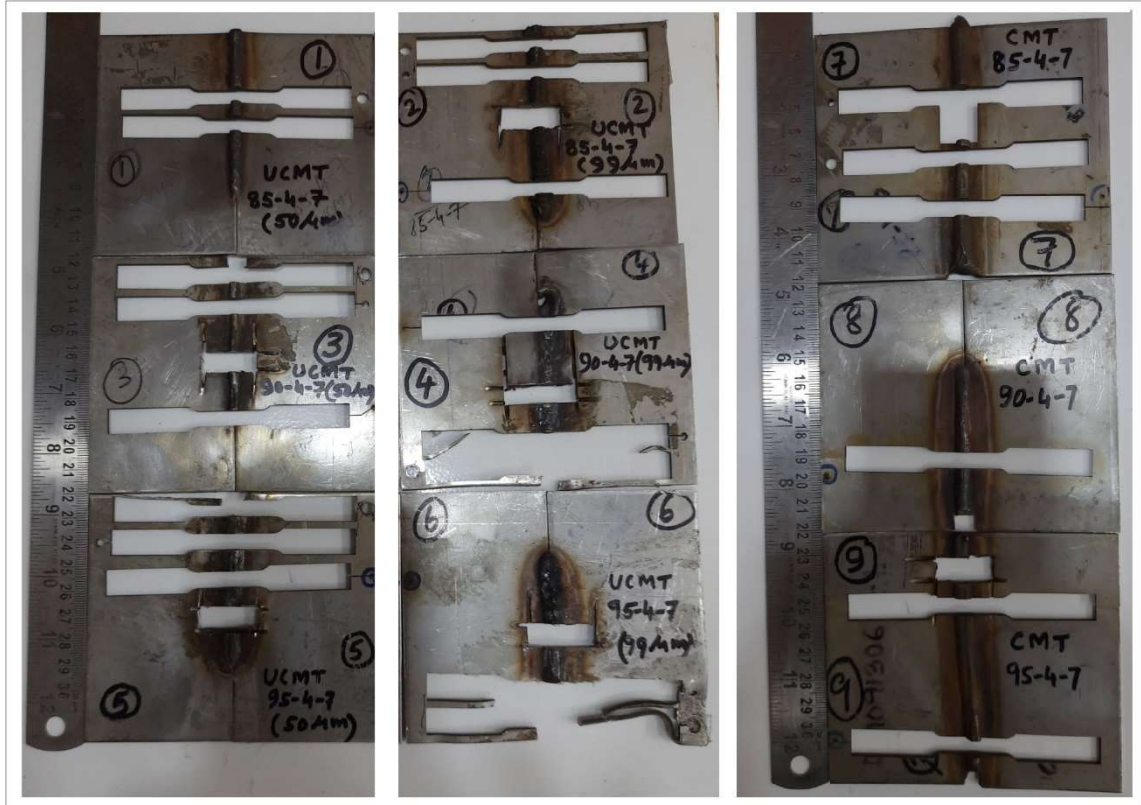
Ultrasonic assisted CMT welded samples
